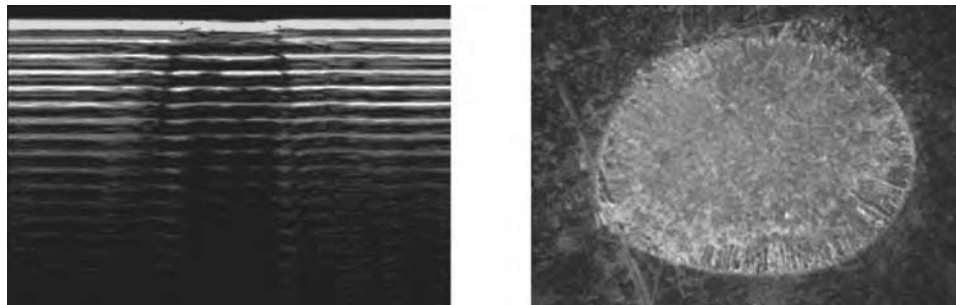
B-scan and faying surface of a cold weld. Current = 6500 A
